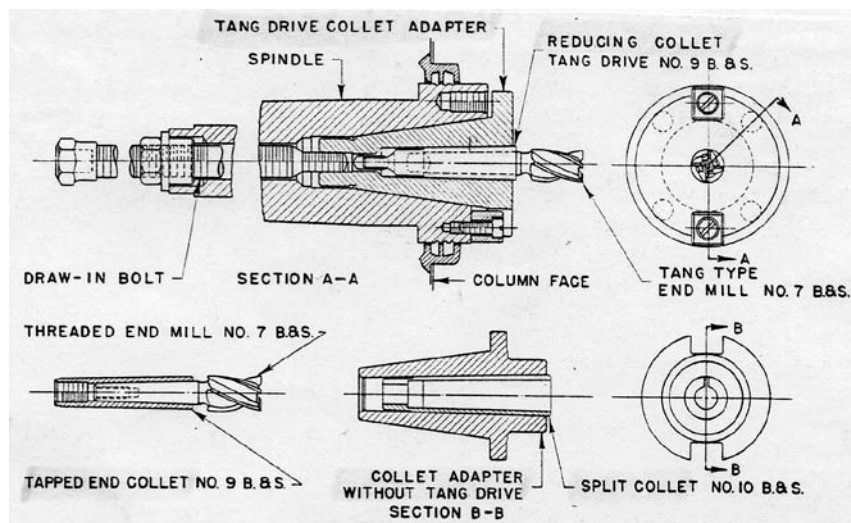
Adapters and collets for self-releasing and self-holding collets
